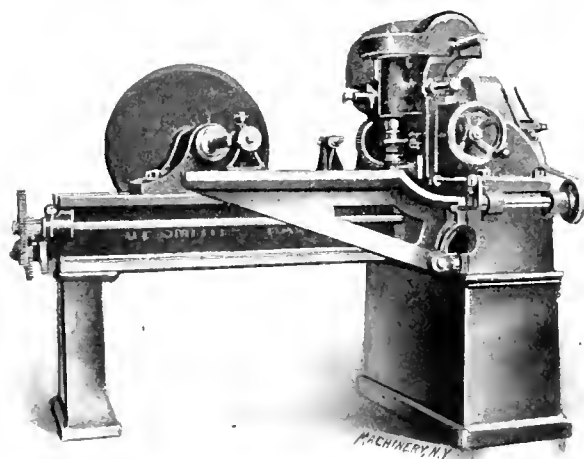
An Example of Machine with L-shaped Bed, as made by G. F. Smith, Ltd.
